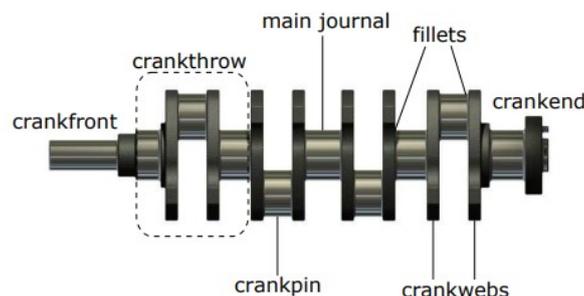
Representation of a four-stroke crankshaft. Adapted from Moraes (2017).
